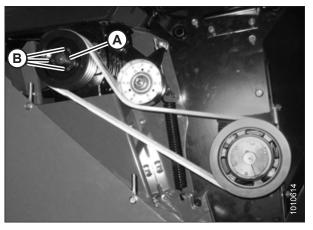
Drive Belt and Pulleys on Left Side Pull-Type
